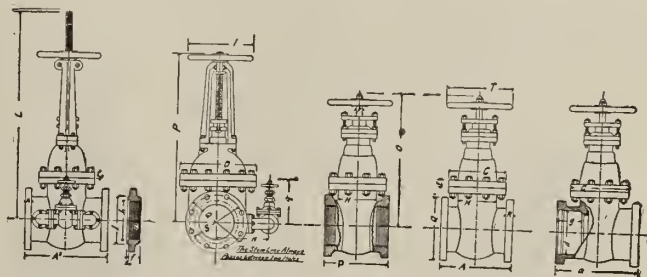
Inside Screw Valve. Can be repacked with pressure on
